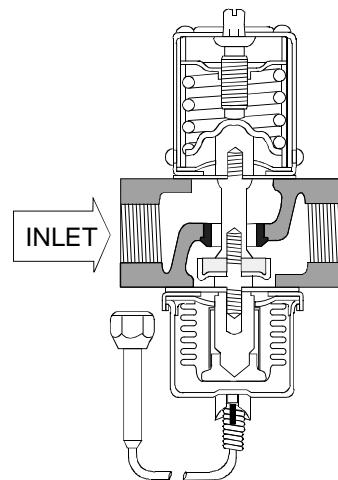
Threaded Type Reverse-Acting Valve Cross Section
